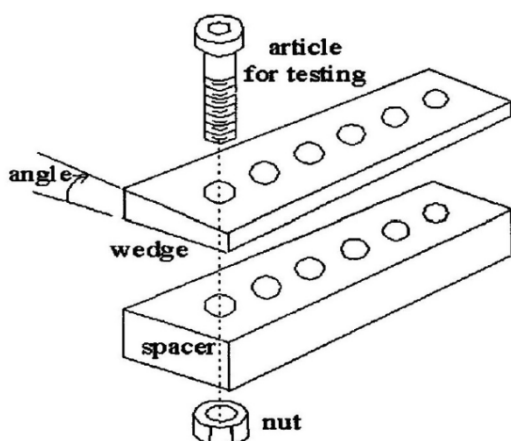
Inclined Wedge Fixture (ASTM B839)
